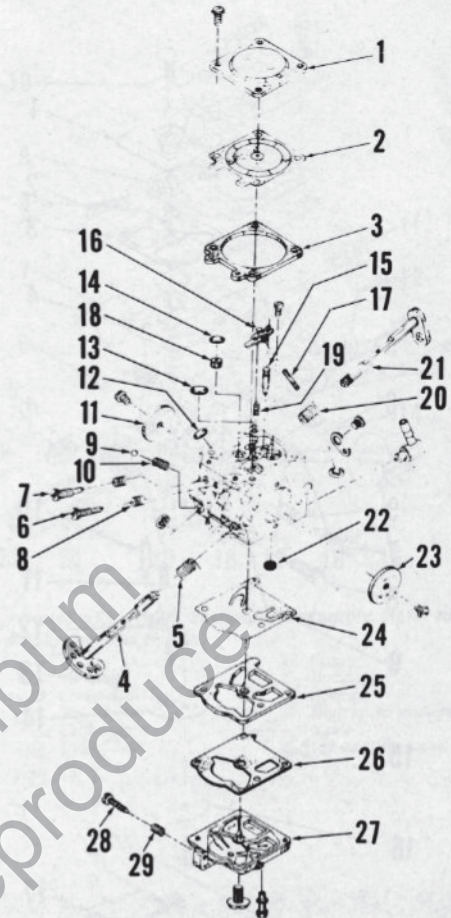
Exploded view of Walbro WT diaphragm carburetor.
